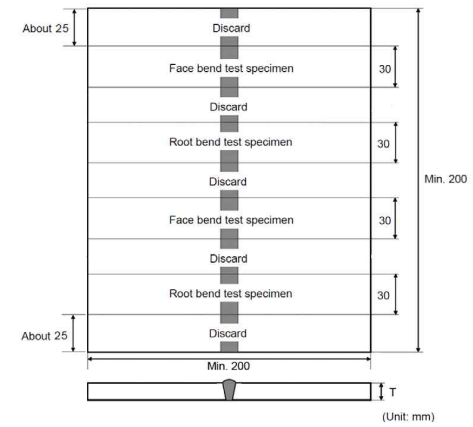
Dimensions and types of test assembly for butt welds (T < 12mm)
